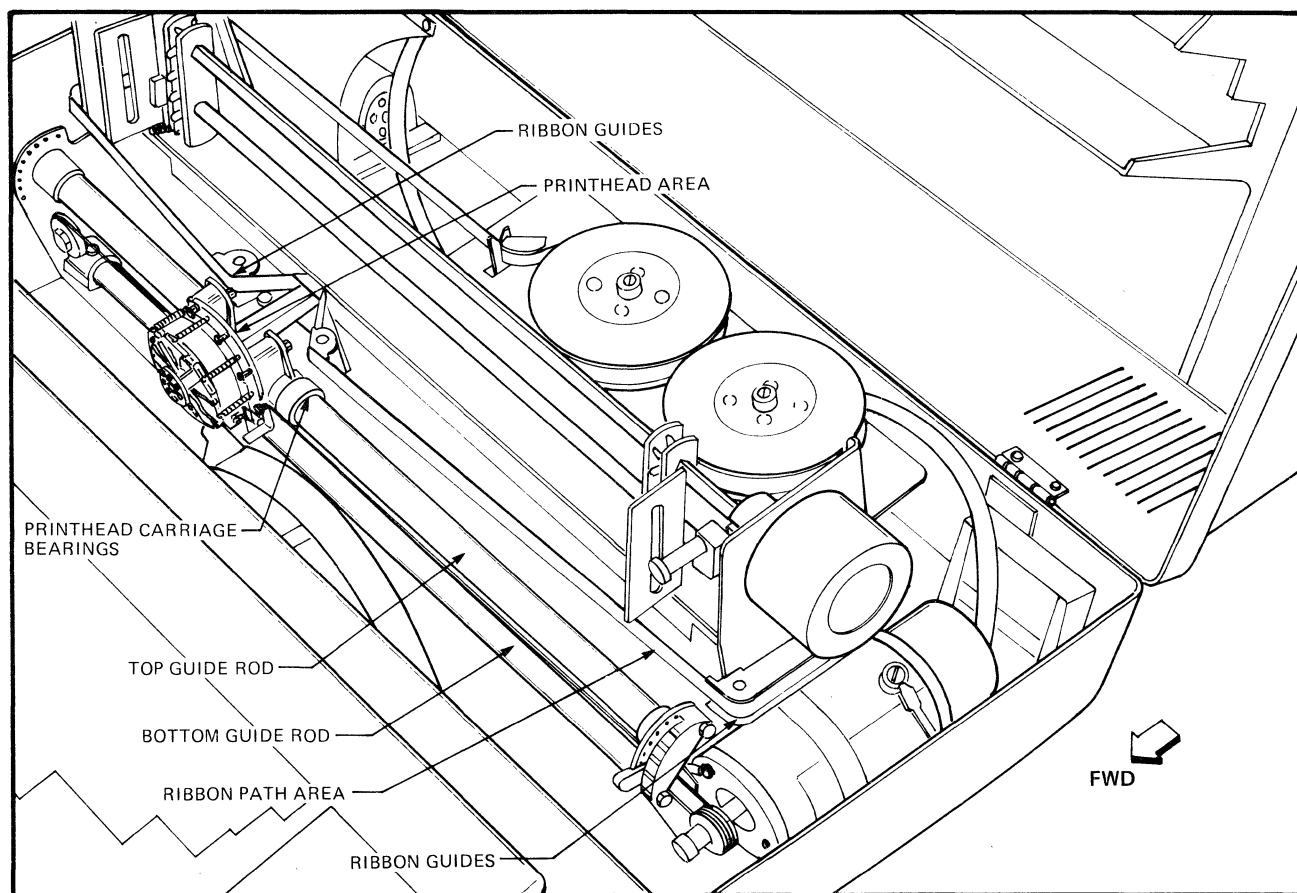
Printhead Area, Guide Rods, and Ribbon Guide
